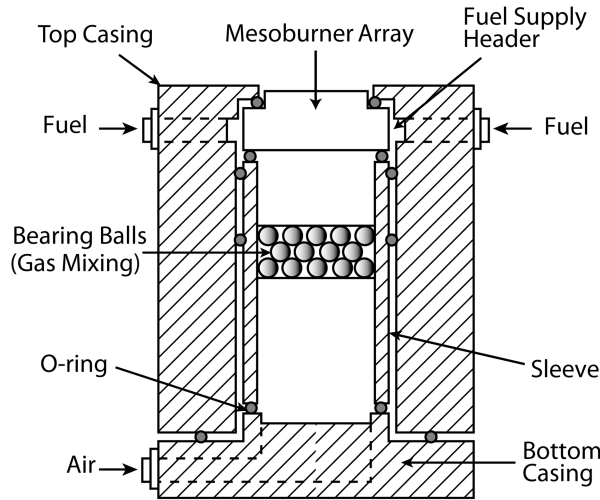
Cross-sectional configuration of the array-housing assembly.
